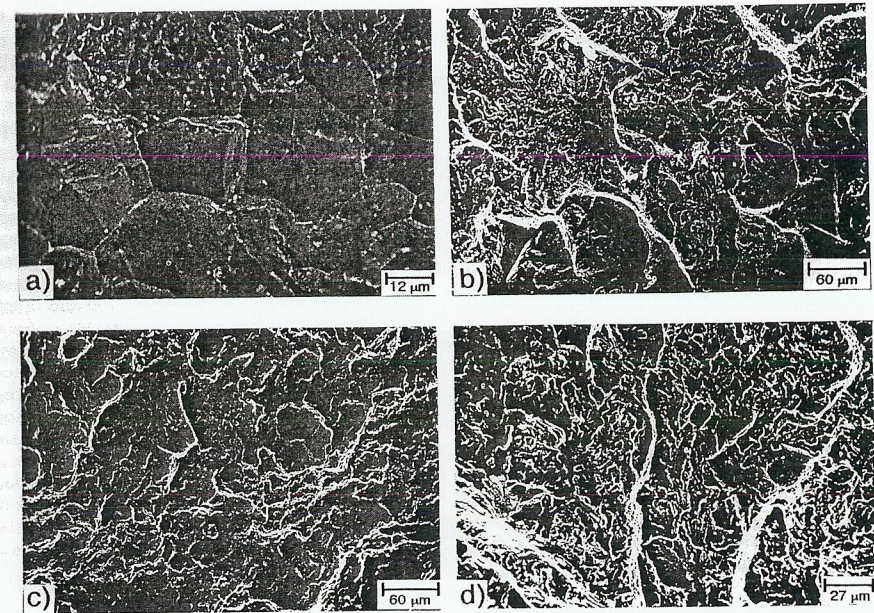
Fracture morphologies of HAC cracking in low hydrogen weldments of HSLA80: a) fracture appearance near crack initiation site in HAZ; b) fracture initiation site associated with bainitic structure of weld metal; c) and d) fracture surfaces associated with columnar boundaries.
